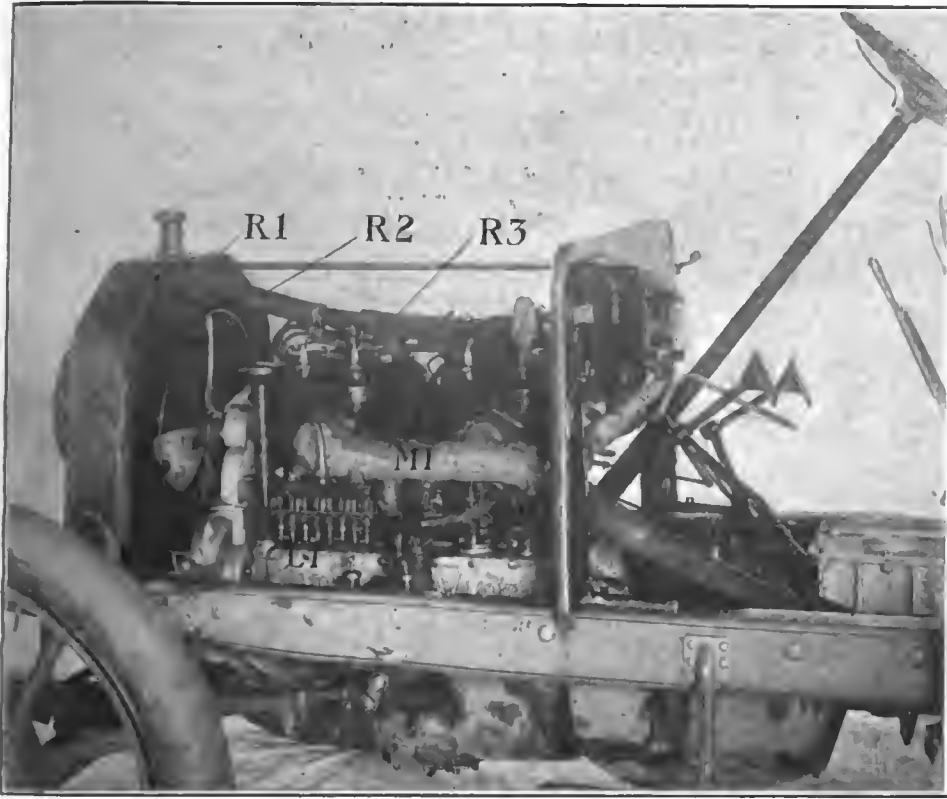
Left side of a 4-cylinder water-cooled motor in a chassis showing the location of the oiler and manifold for the exhaust
